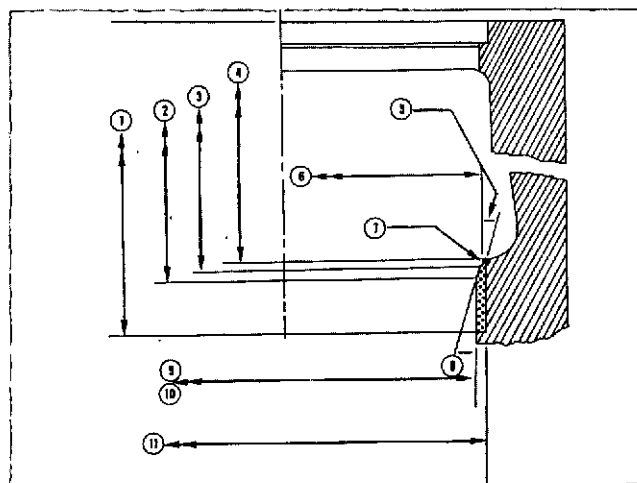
, V40108. Sleeve and block boring dimensions
